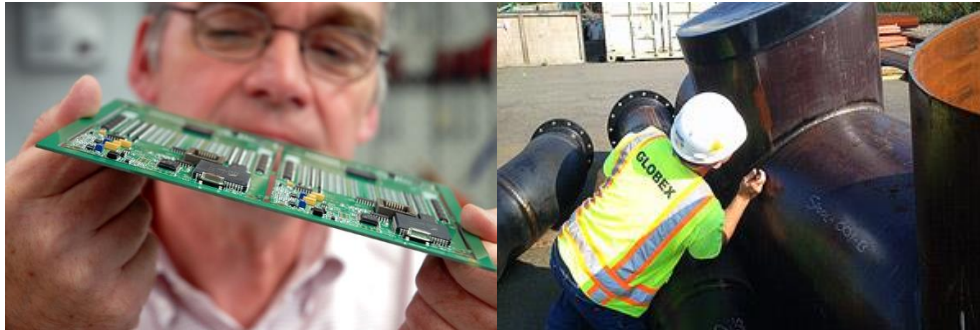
Visual Inspection (1) Circuit Board [1] (2) On-site Weld [2]
